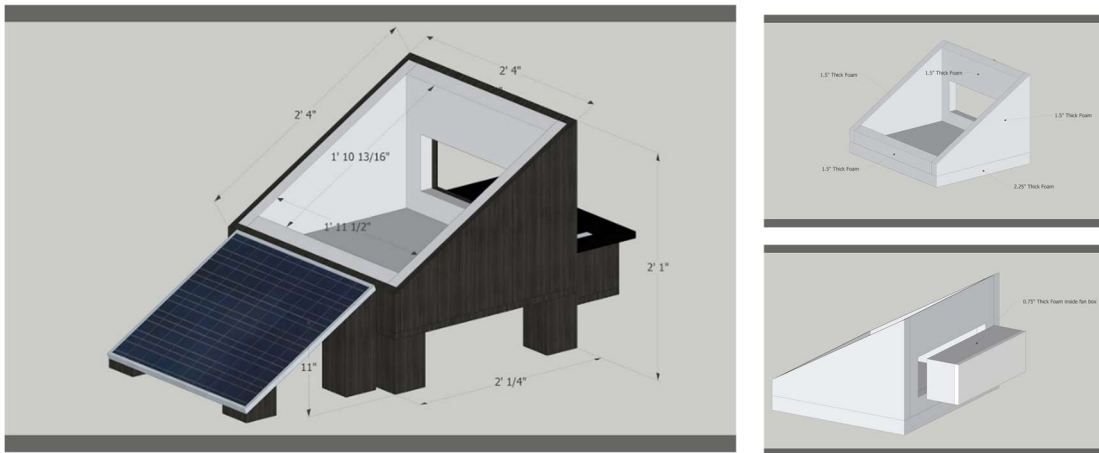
a) CAD Total View [left] b) CAD Insulation Front [top right] c) CAD Insulation Rear [bottom right]
